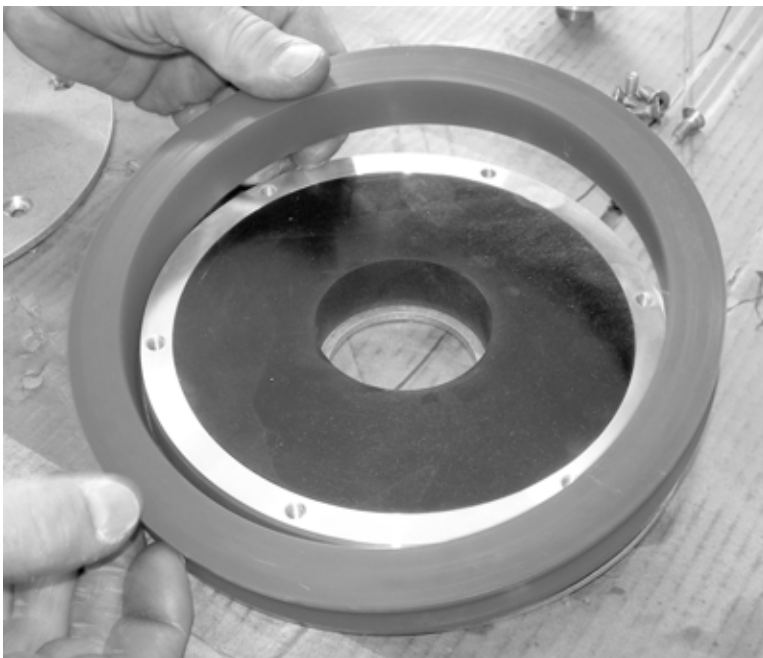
Pull the liner off the wheel. You may have to pry it with a screwdriver to get it loose.
